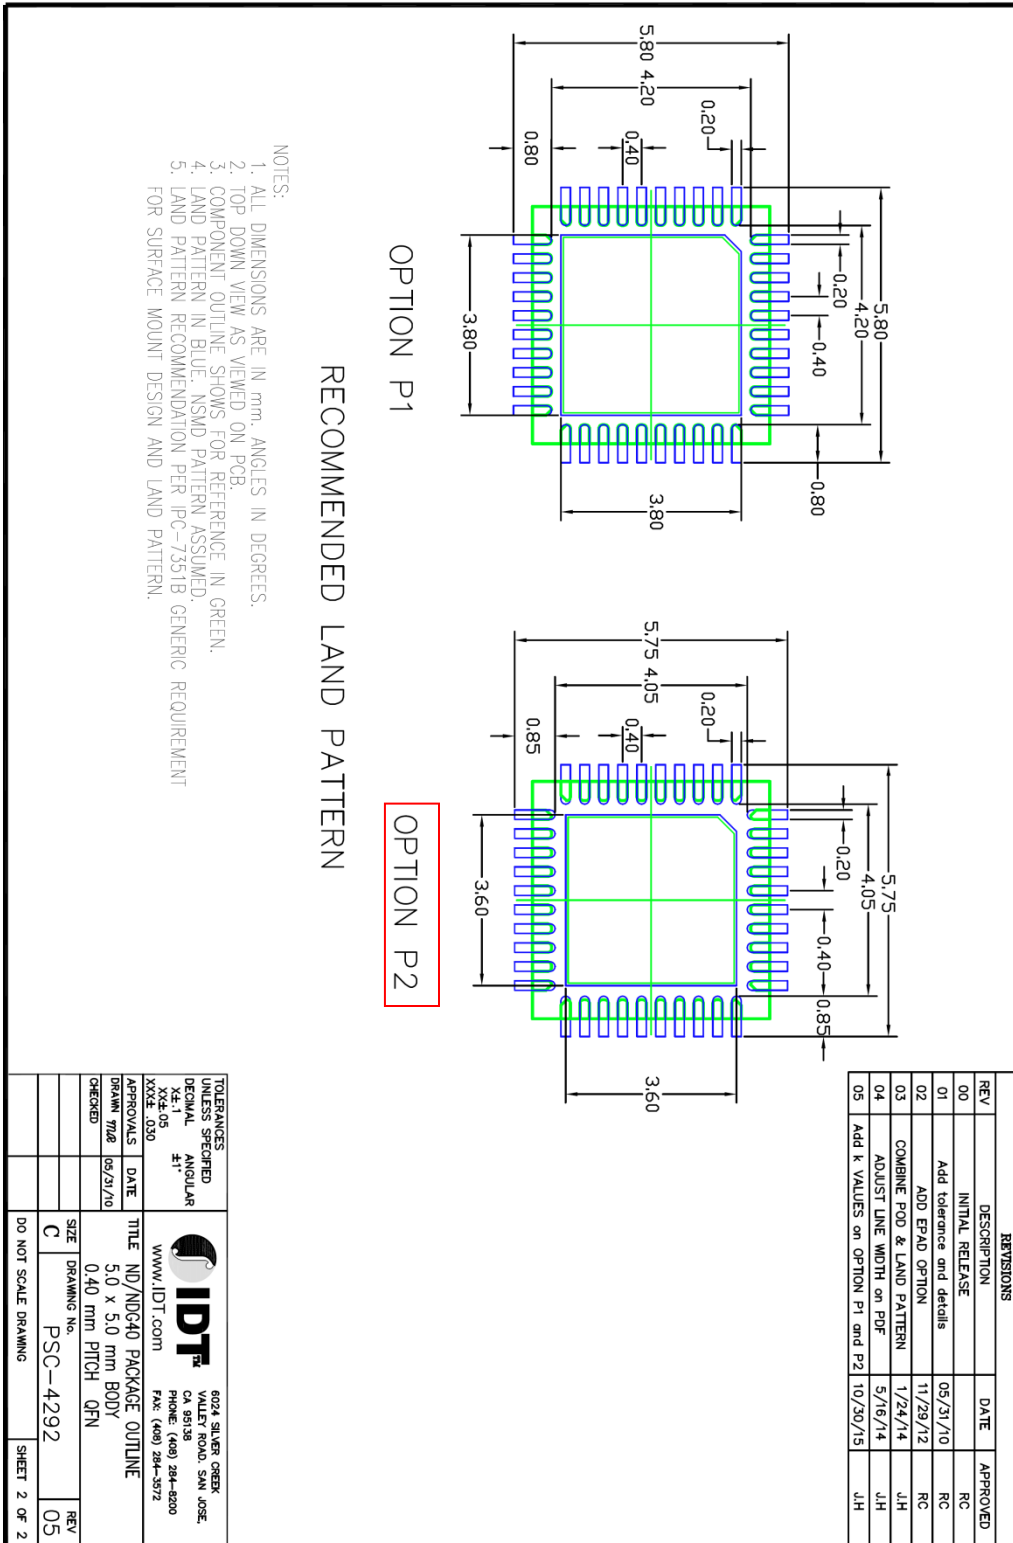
QFN-40 NDG40 Landing Pad Drawing
